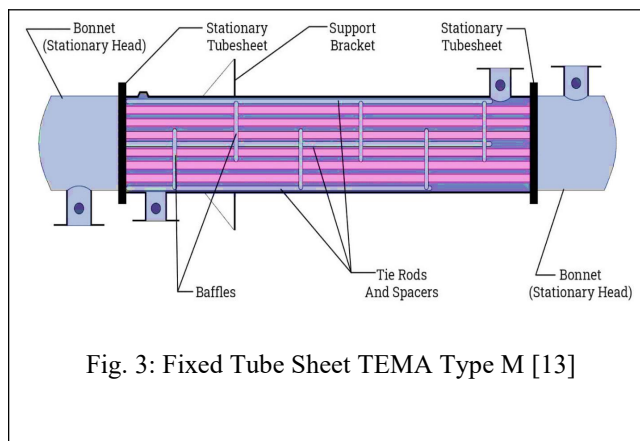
Fixed Tube Sheet TEMA Type M [13]
